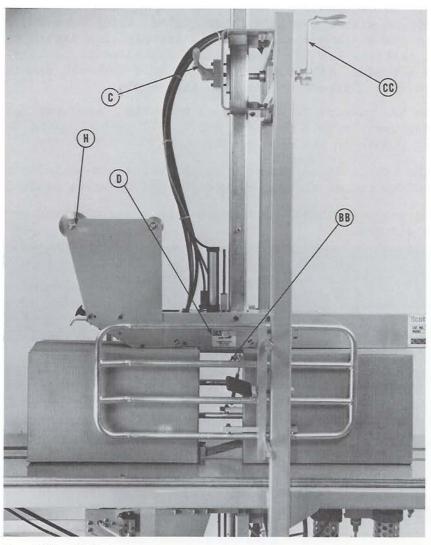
TOP TAPING HEAD & HOLD DOWN SKI - RIGHT SIDE VIEW
